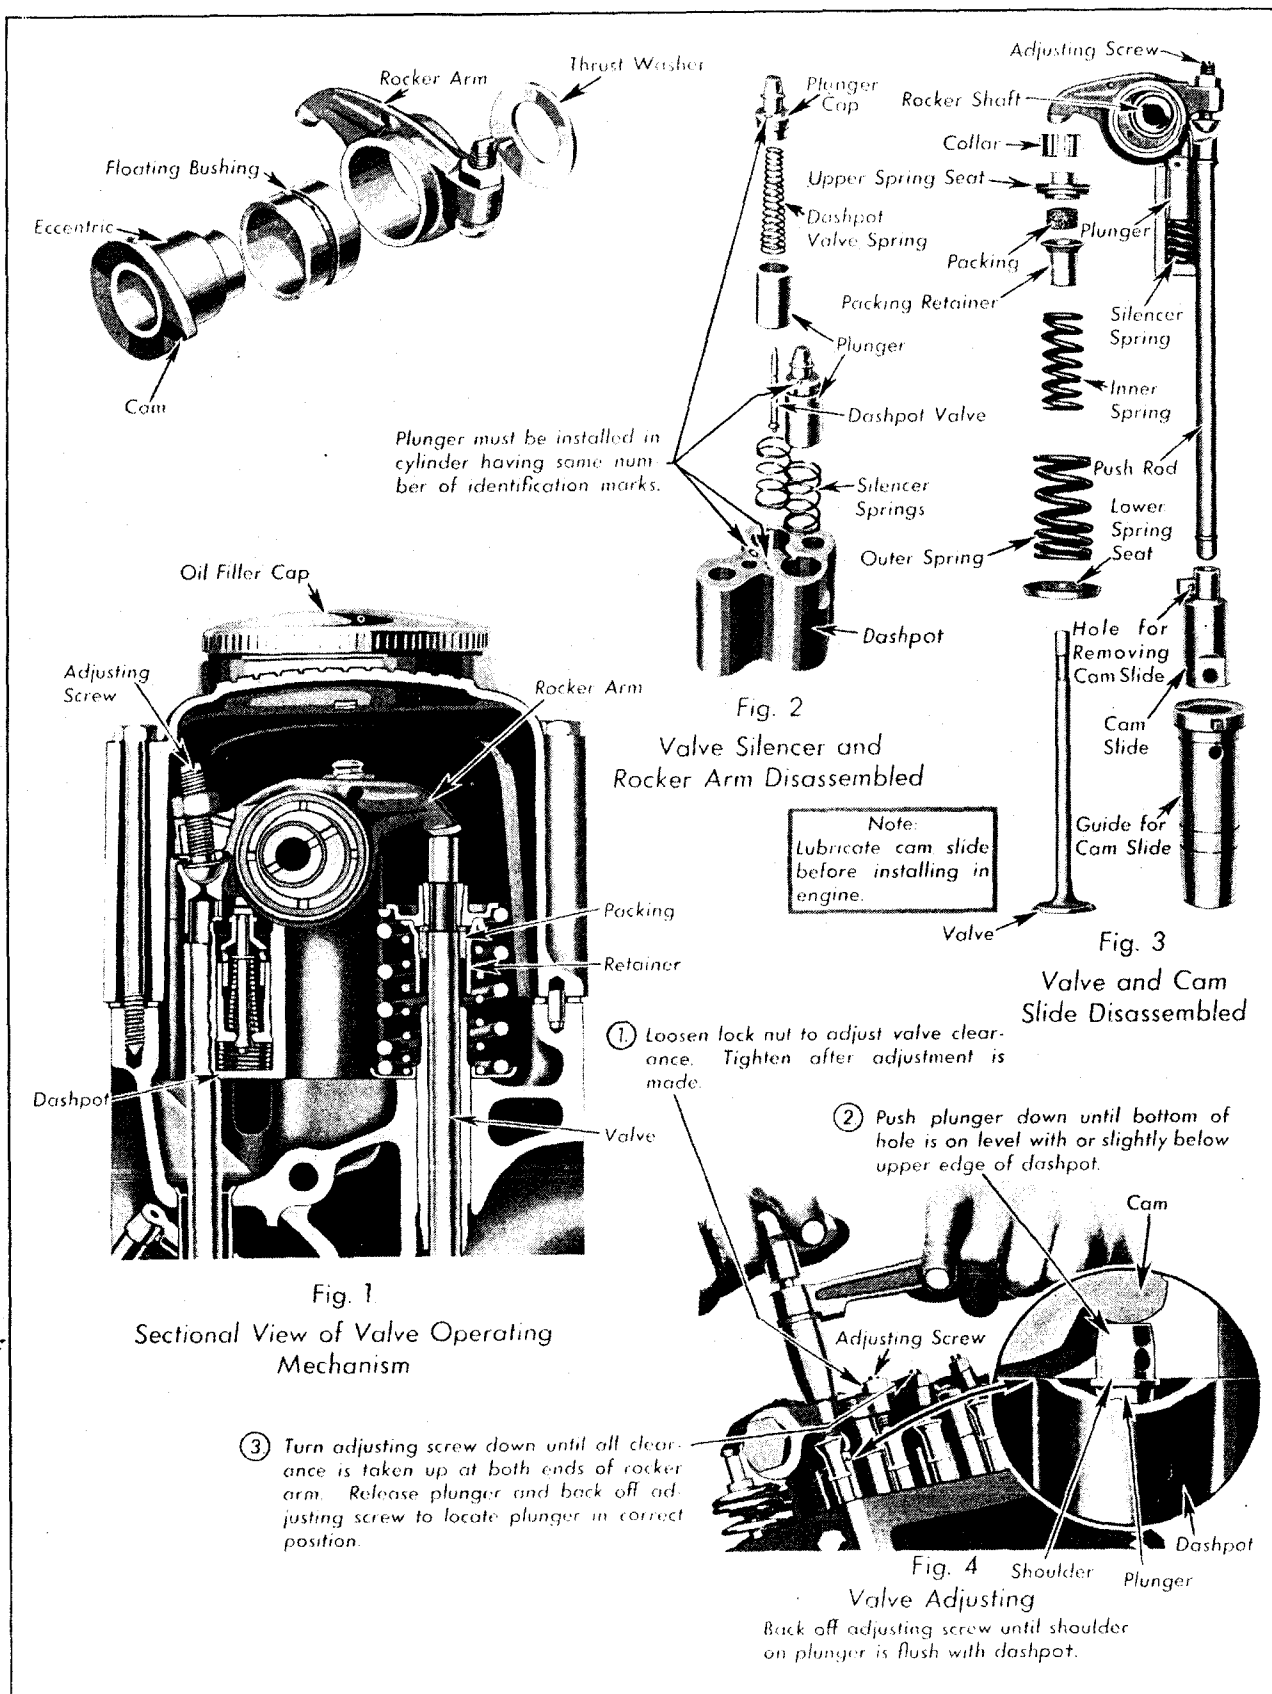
Valve Details-- Cadillac 370-B and 452-B
